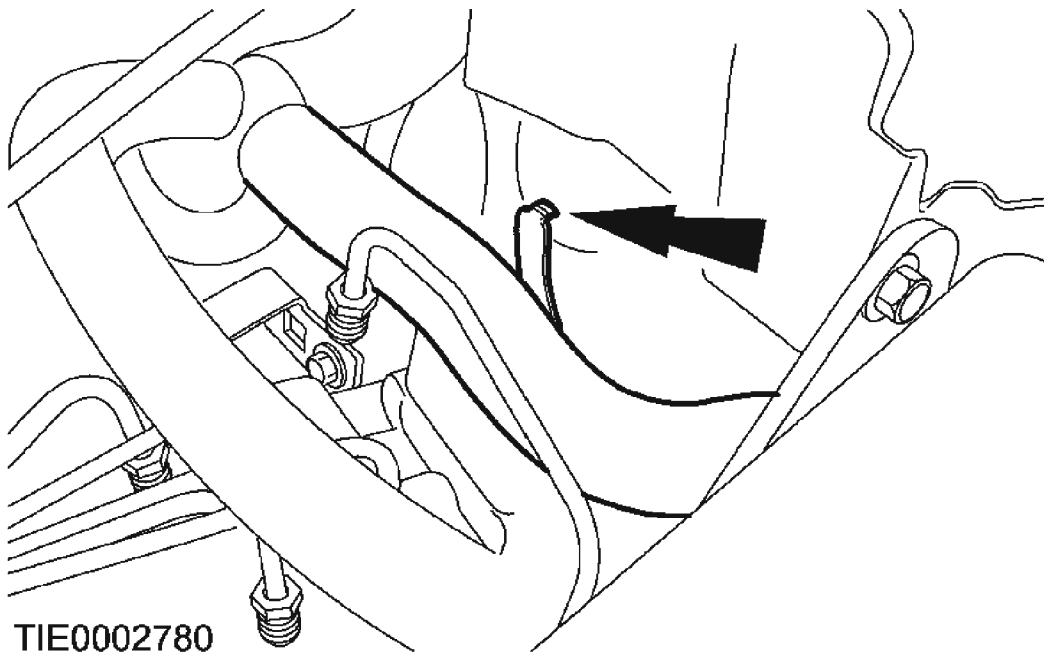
Disconnecting Wiring Harness From Wheelhouse Assembly
